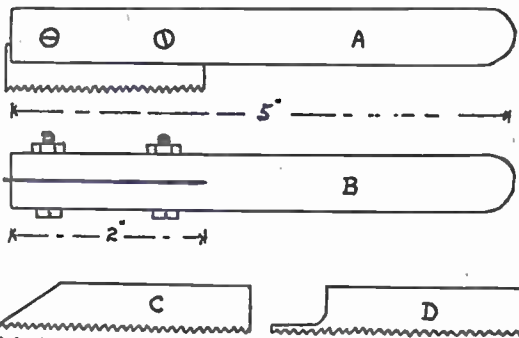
Figs. A and B give two views of the saw and show clearly how it is made. The hacksaw blade is broken into lengths of 2 ins. or 3 ins. and the ragged ends ground off smooth.
